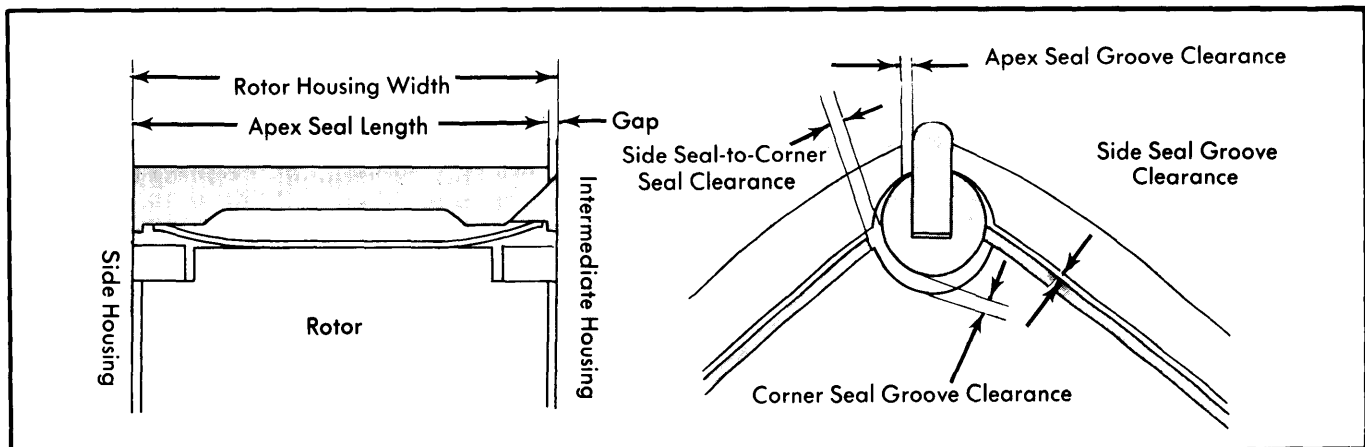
Measuring Clearance of Apex, Side & Corner Seals
